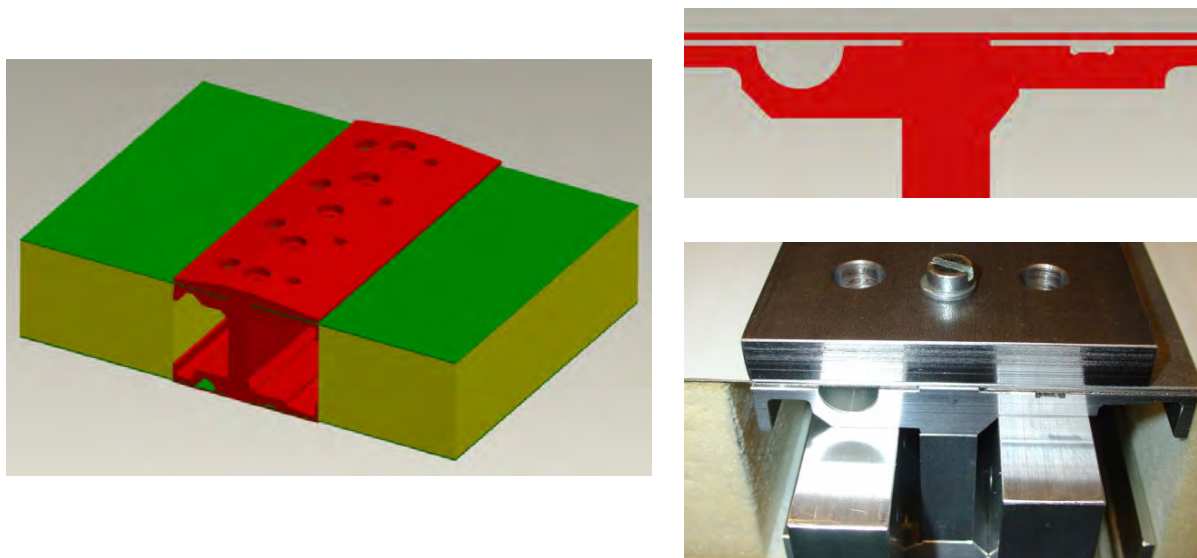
CAD-model of prototype (left: assembly; upper right: cross-section with cavity for punching on the left and cavity for clinching on the right; lower right: same view but actual prototype)
